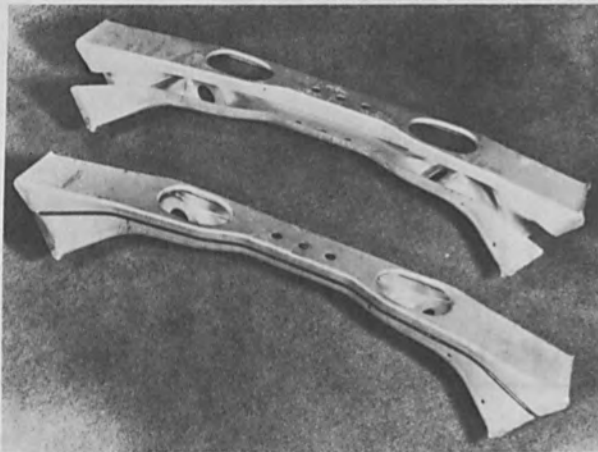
AUTOMOTIVE BODY CROSS-FRAME MEMBER - WELDED BY NVEBW.
